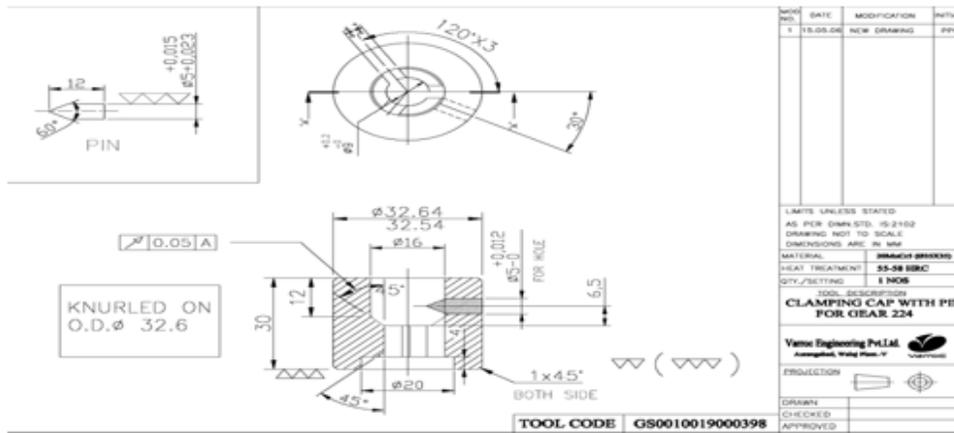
Drawing of clamping cap after designed changes (modified drawing of clamping cap).
